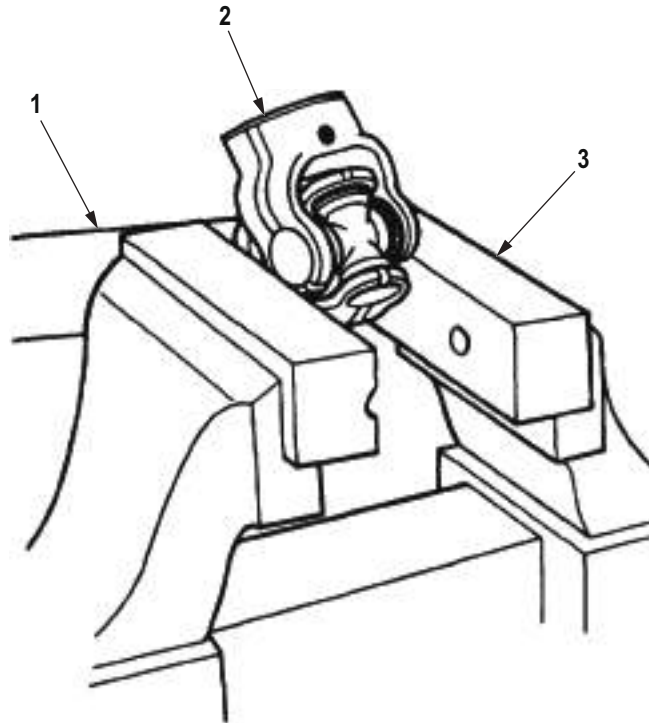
Transmission PTO-To-Hydraulic Pump Propeller Shaft Assembly.
